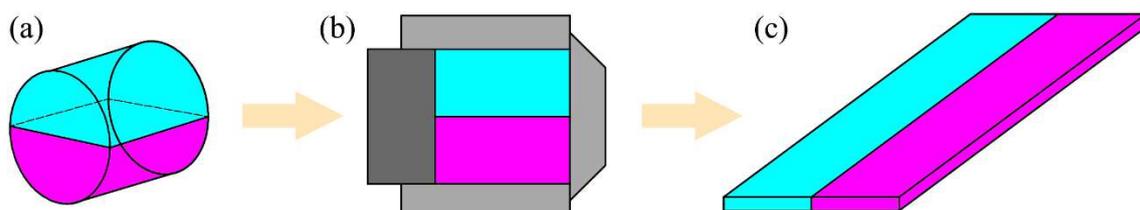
Schematic diagram of process principle (a) Assembly (b) Extrusion (c) Forming
